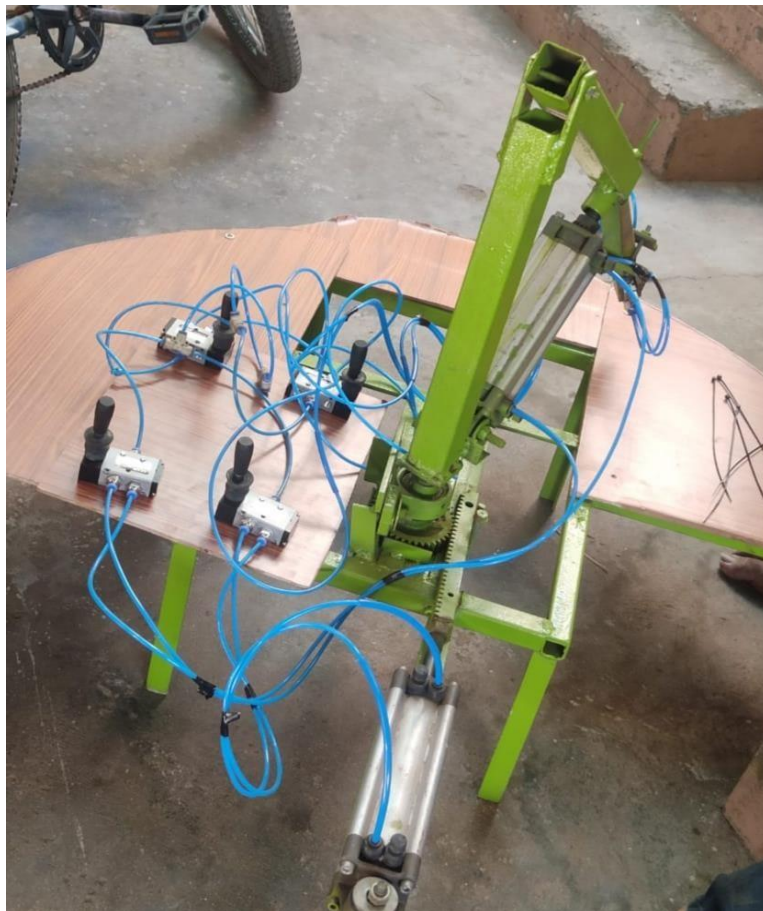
FABRICATION OF PNEUMATIC CONTROL MECHANICAL ARM
